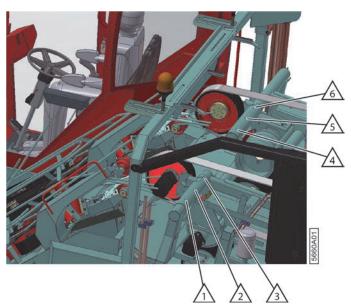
Lubricating the pivot shafts of the crushing rollers
